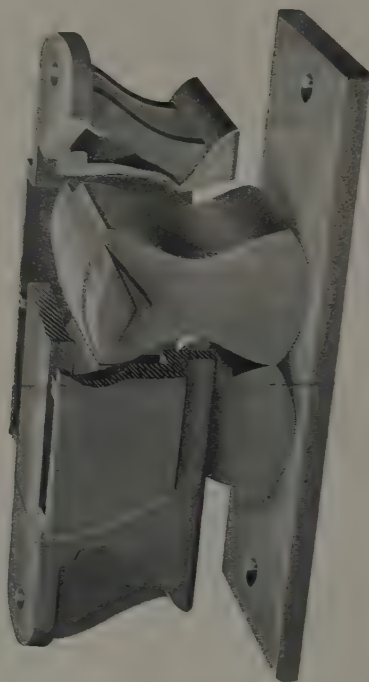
Tip-Roller Side Bearing for Application to Body Bolster.
